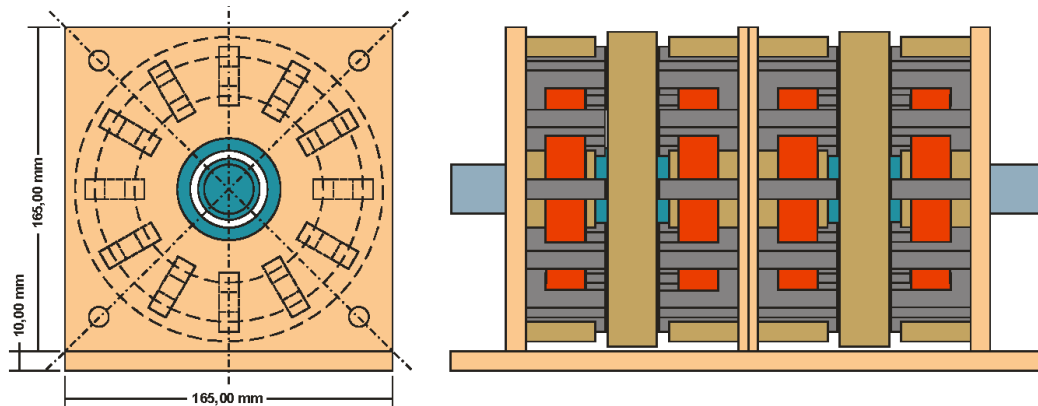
Exterior view of the completely mounted 2 phase double stator Transversal Flux Machine (case removed).
